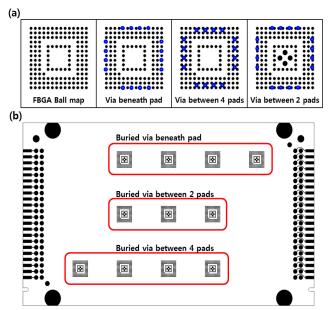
(a) Buried via (blue circle) design of PCB, (b) buried via designed JEDEC PCB divided by 3 groups (beneath pad, between 4 pads, between 2 pads).
